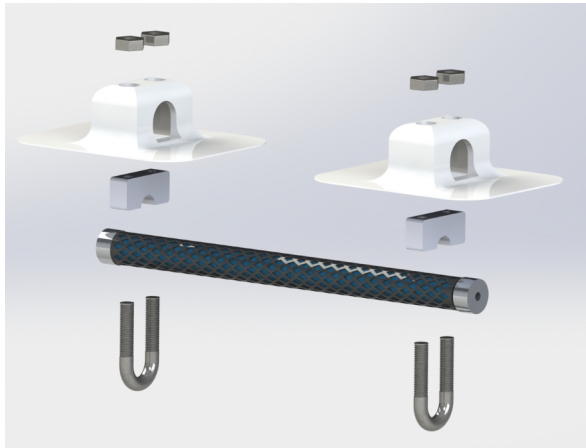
An exploded view of a 3D-render of a pneumatic muscle (PAM) and skin anchor system.
